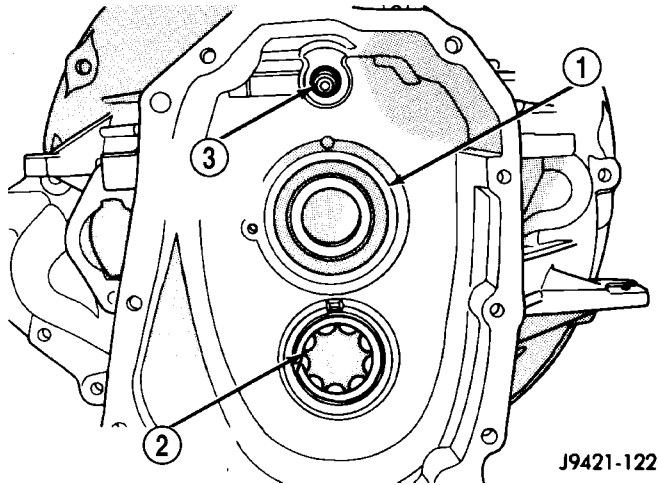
INPUT SHAFT AND COUNTERSHAFT FRONT BEARING
